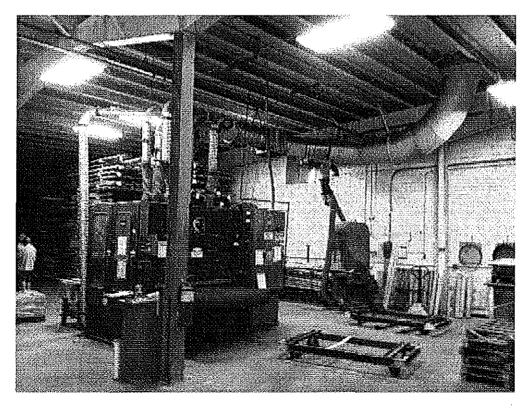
(7/24/2014): Interior ductwork of waste handling collection system.
